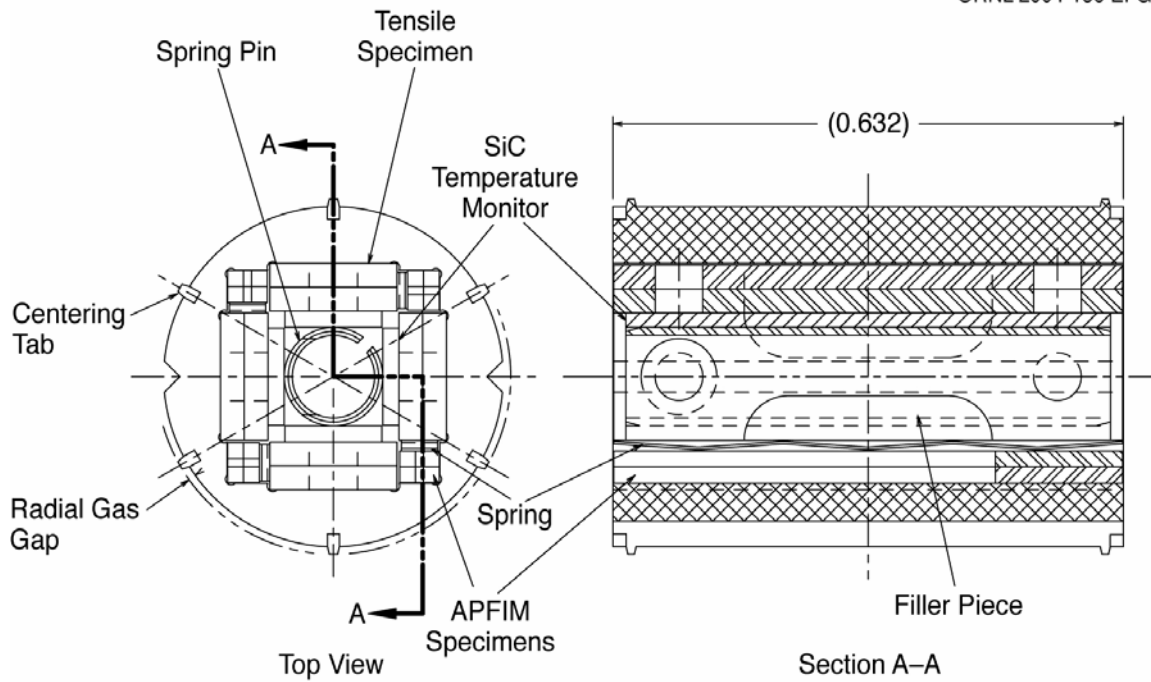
Specimen holder subassembly used in JP-26 for SS-J3 tensile and APFIM specimens
